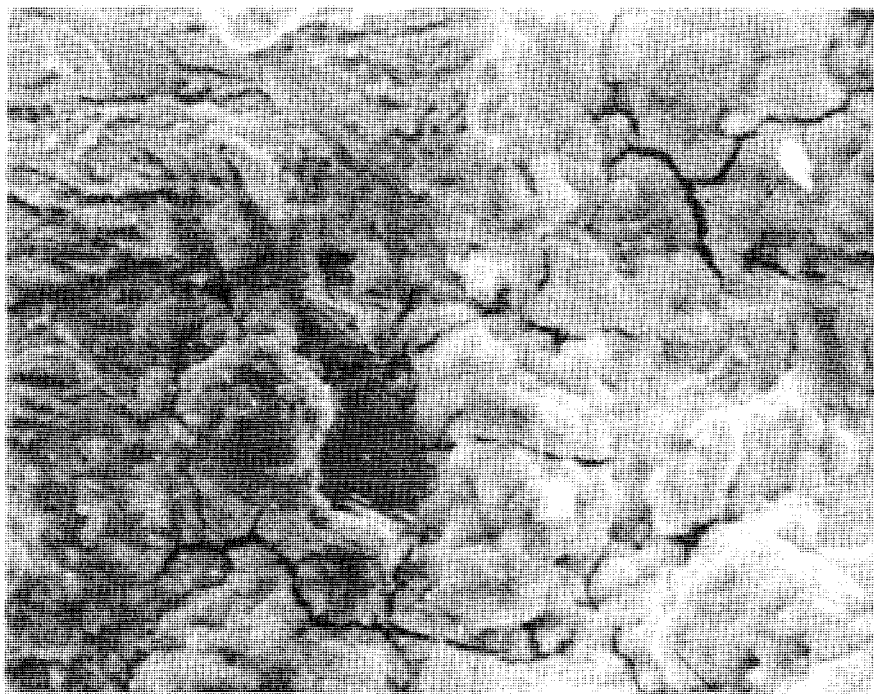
SEM of corroded fracture surface showing prevalent “mud-cracking”. Mag. 2500x.
